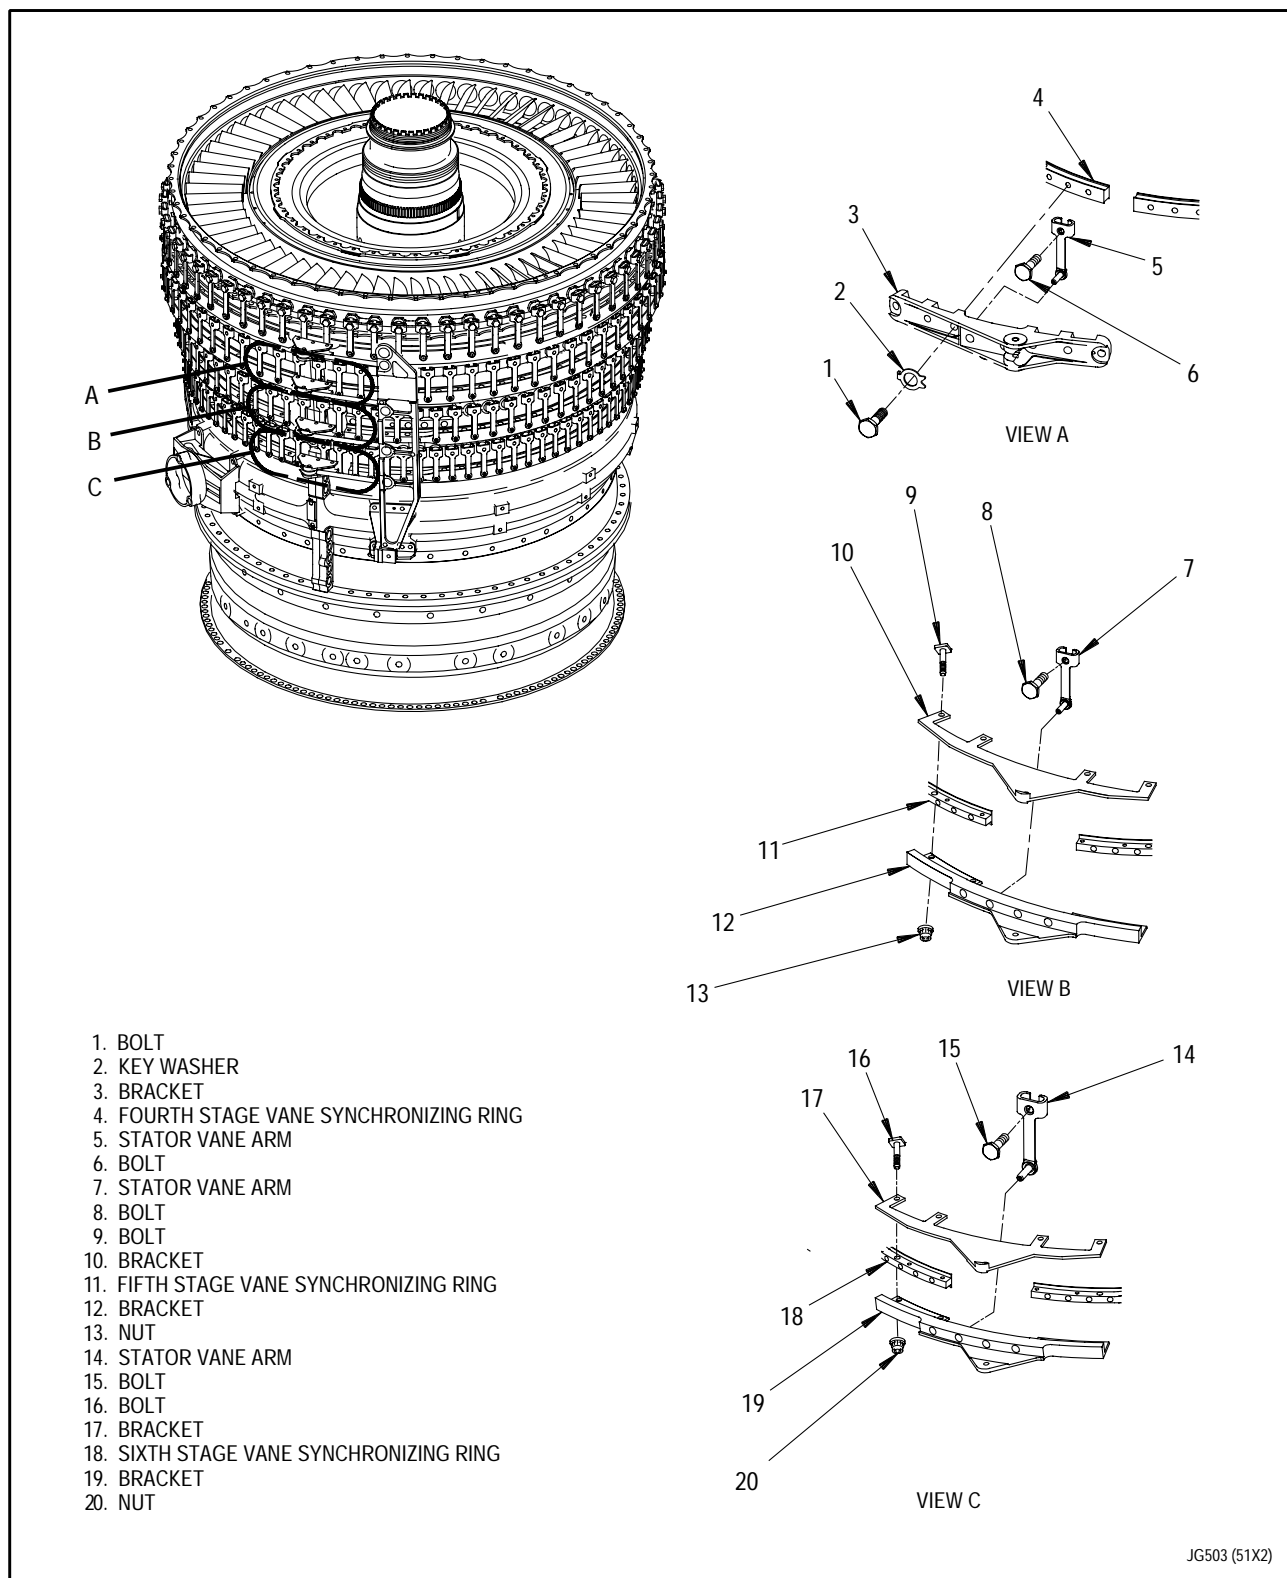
Fourth, Fifth, and Sixth Stage Synchronizing Ring Brackets - Removal
